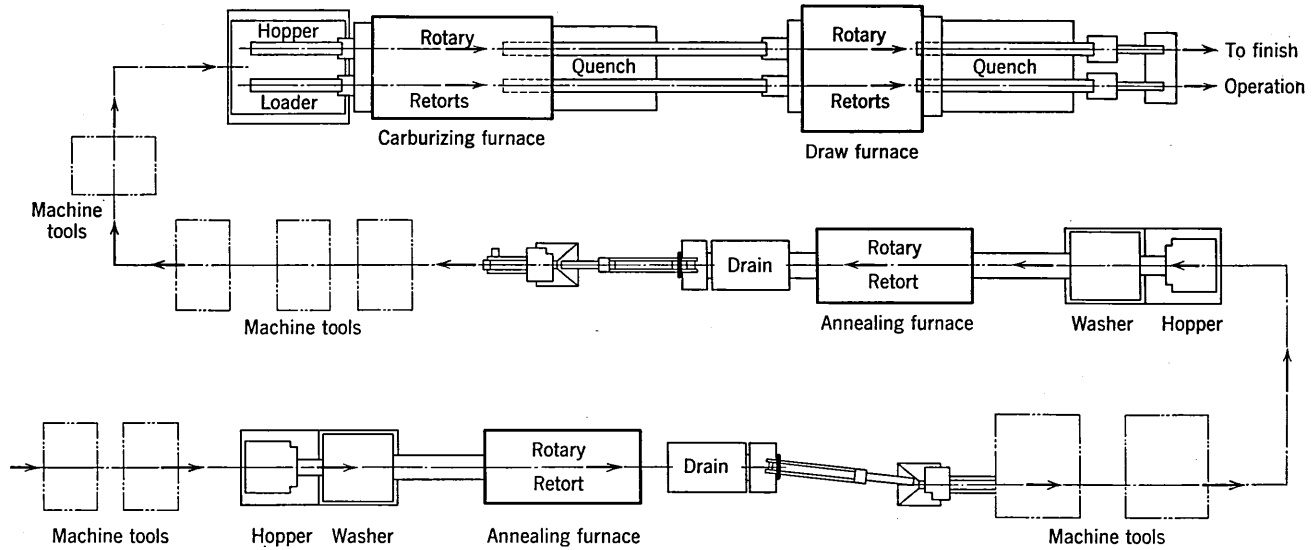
Flow plan and machine arrangement for producing hardened finished bearing races (Courtesy Surface Combustion Corp.)
